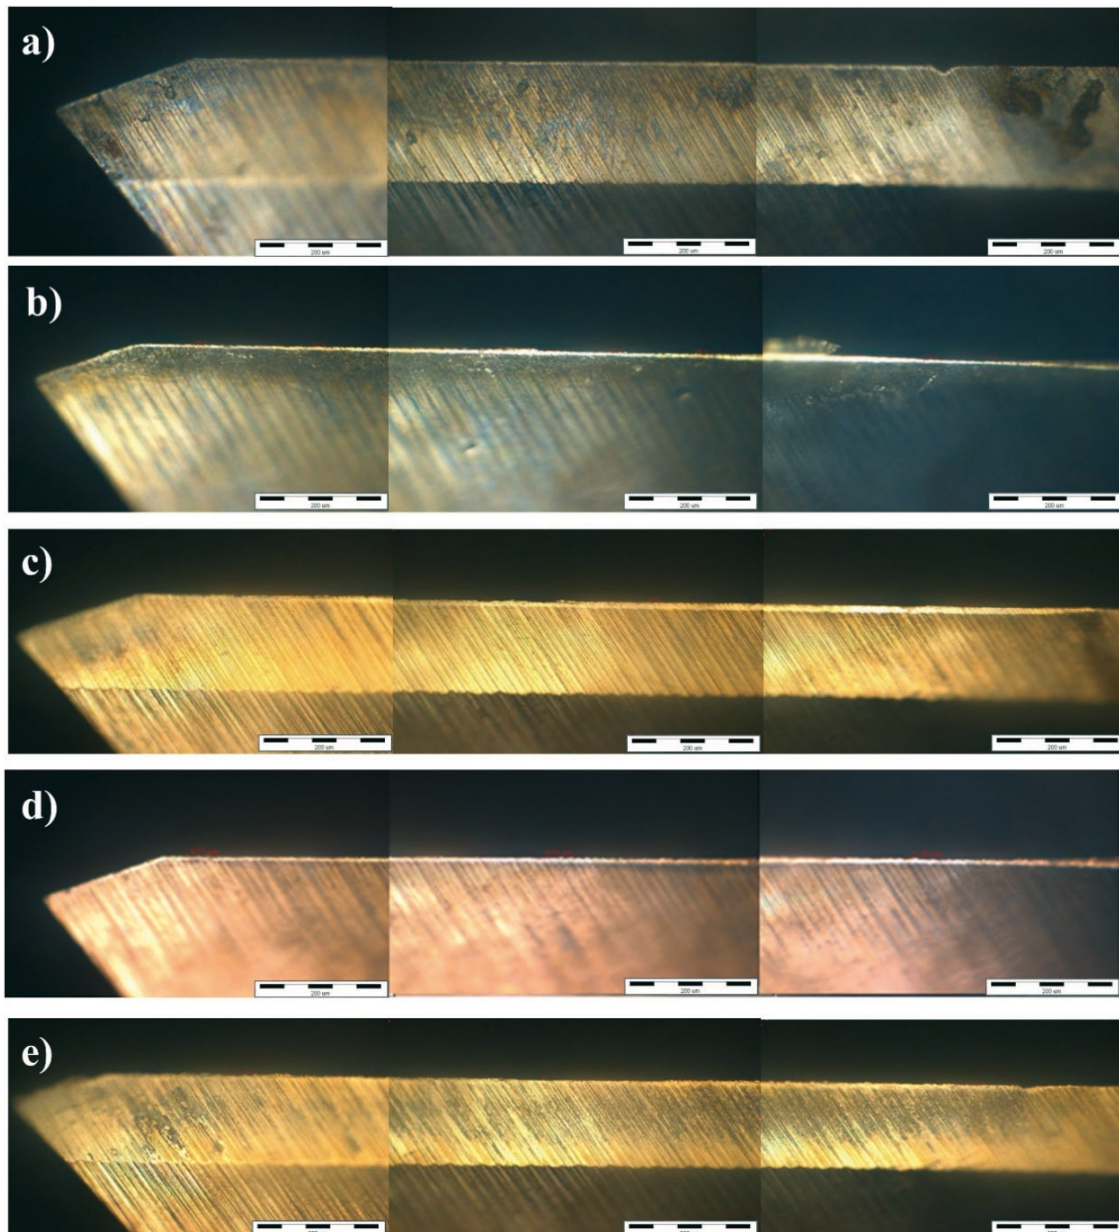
Flank condition after cutting to 100 mm (a) SKS3 (b) SUS316 (c) S50C
